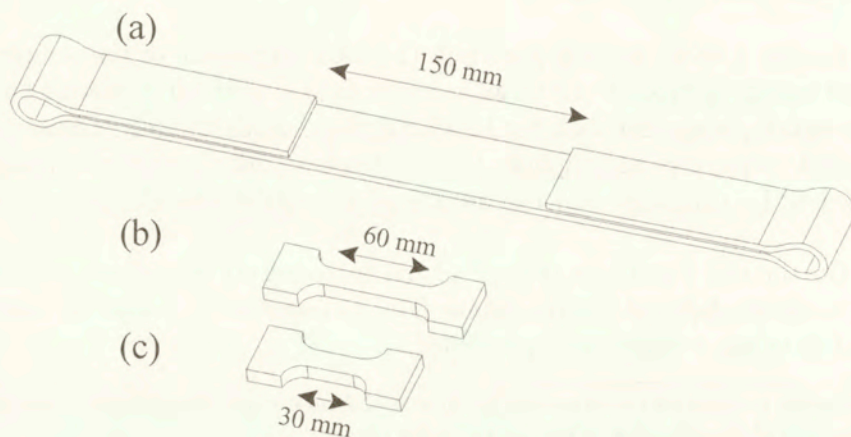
Sketches of the fabric sample (a) and of the machined samples (b) and (c).
